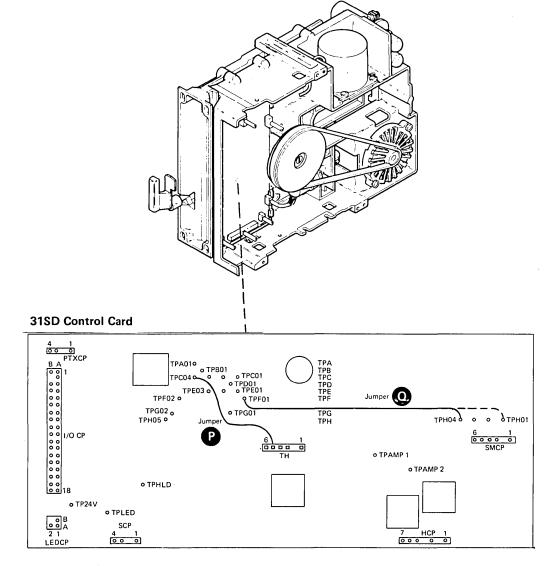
(Part 2 of 2). Head/Carriage Adjustment
